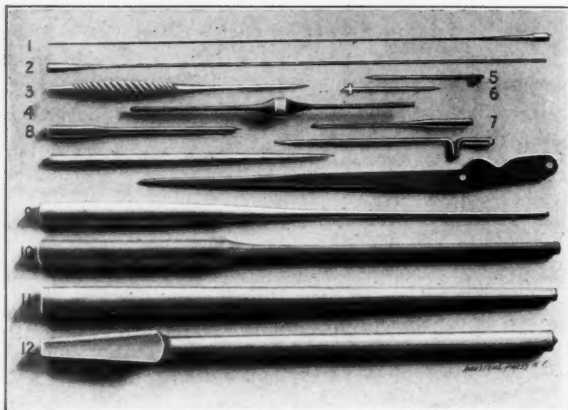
Samples of Work Done with the Rotary Swaging Machine.
